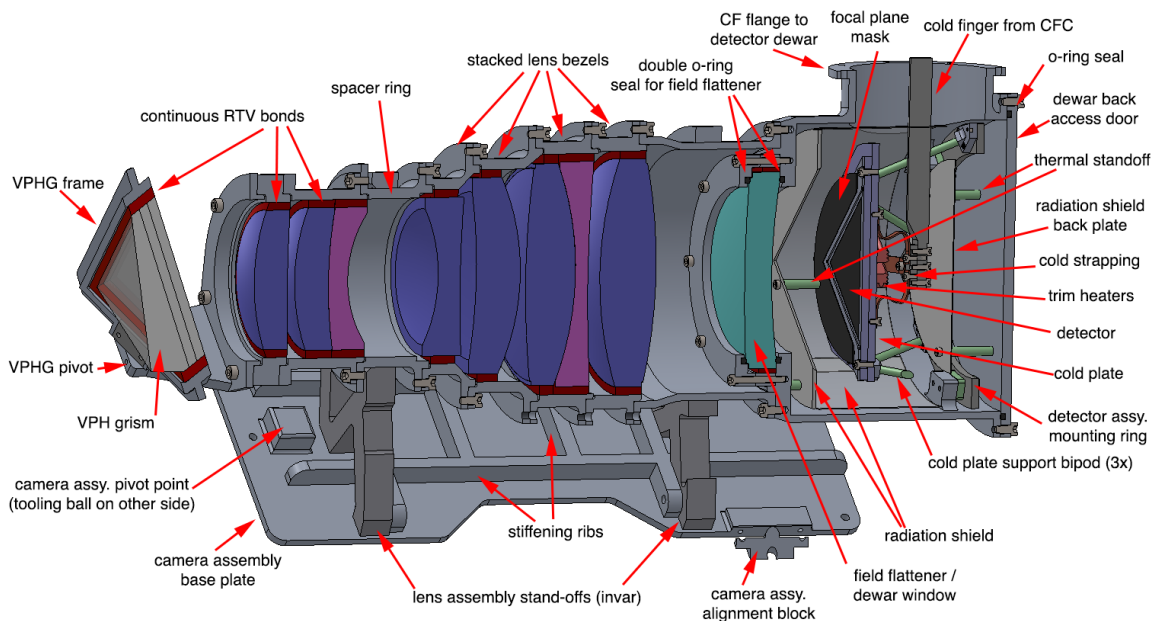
Details of the camera assembly represented by the Red camera in a cross section/cutaway view
